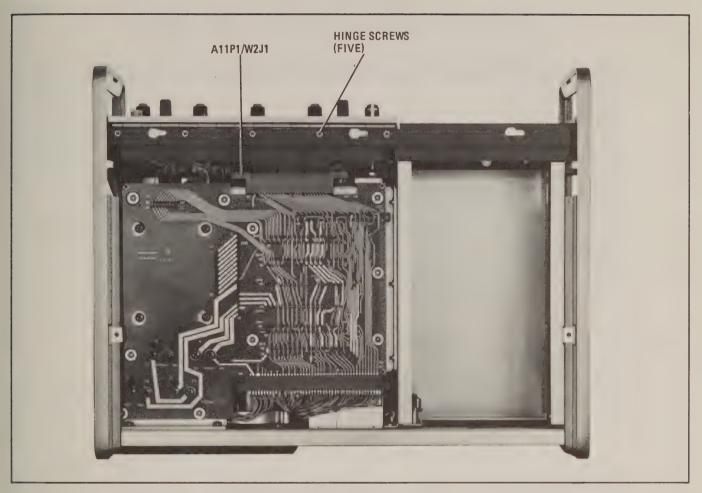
Removing Hinged Front Panel Assembly From Mainframe
